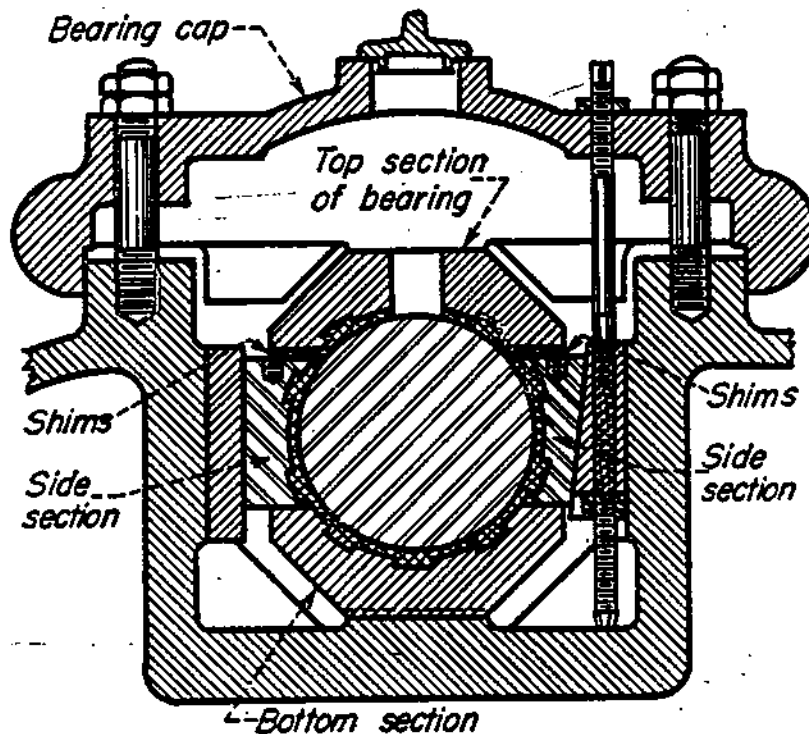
Four-part babbitted main bearing used on large power pumps.
